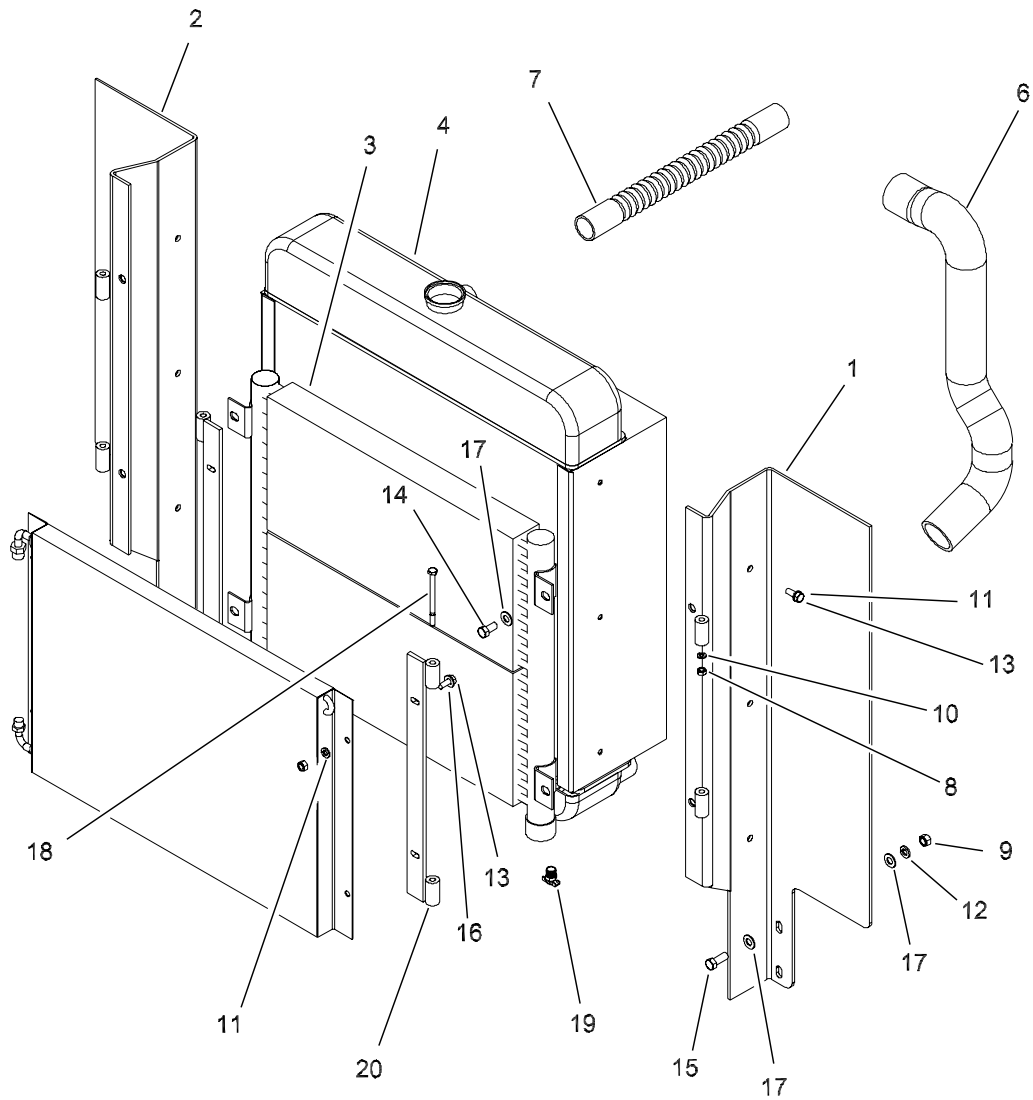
RADIATOR/COOLER ASSEMBLY
